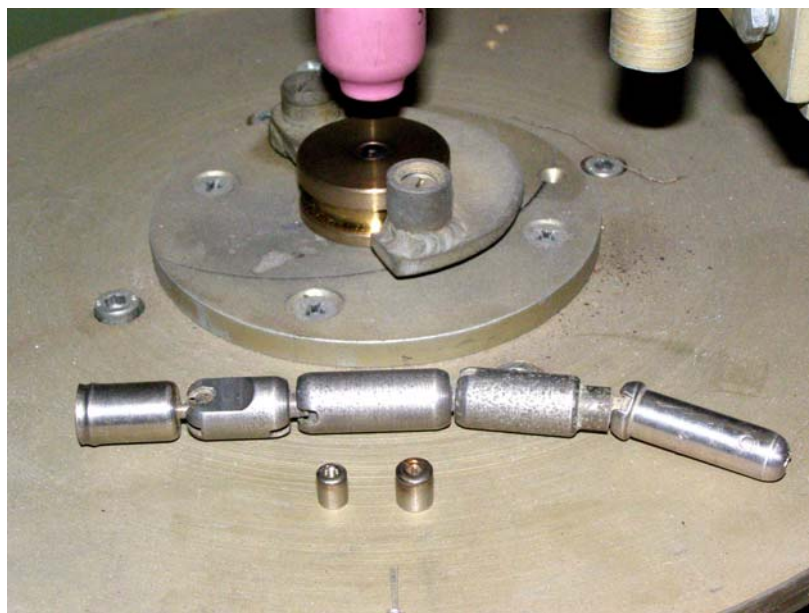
The welded IRS capsules (two pieces ahead) and the technological chain of the industrial defectoscope "GAMMARID".
